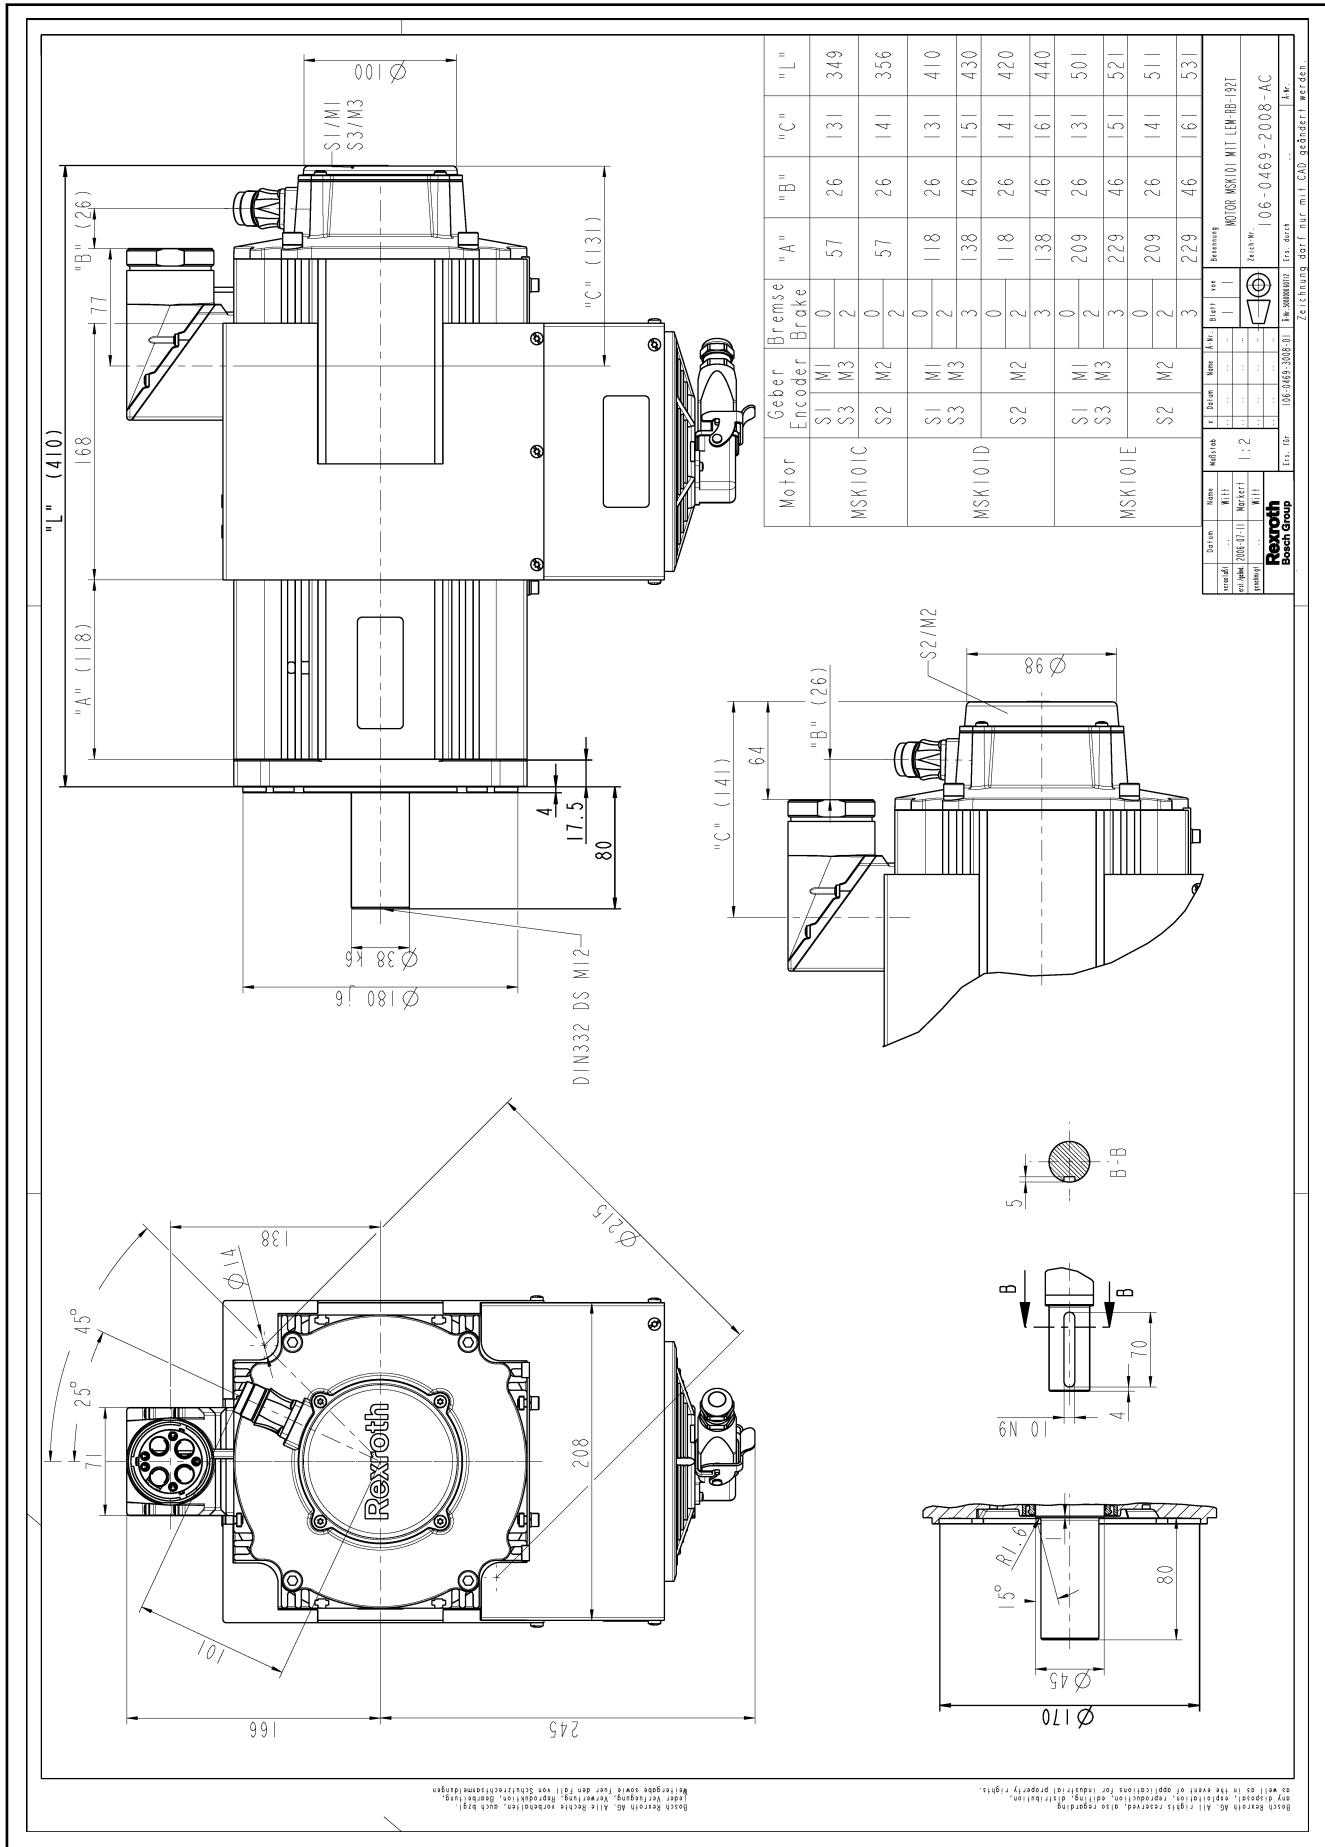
Dimension sheet MSK101 with radial fan unit
